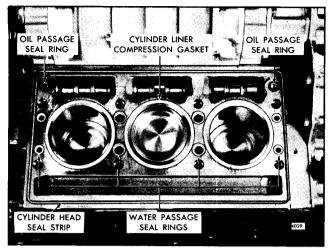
Cylinder Head Gaskets and Seals in Place on Cylinder Block
